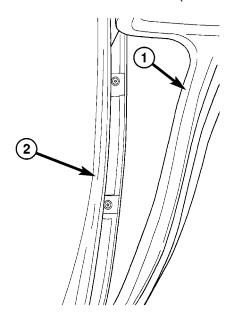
FRONT DOOR OUTSIDE BELT WEATHERSTRIP
